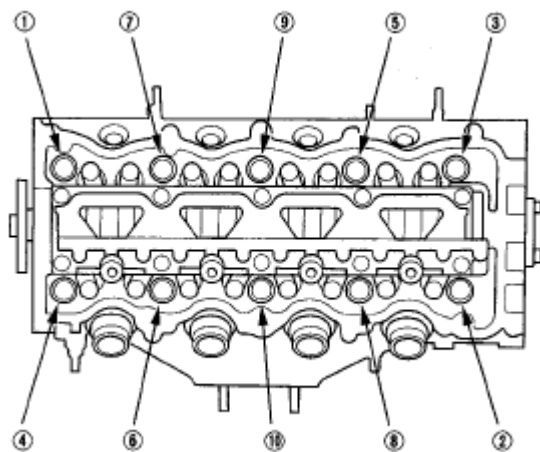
Identifying Loosening Sequence Of Cylinder Head Bolts
